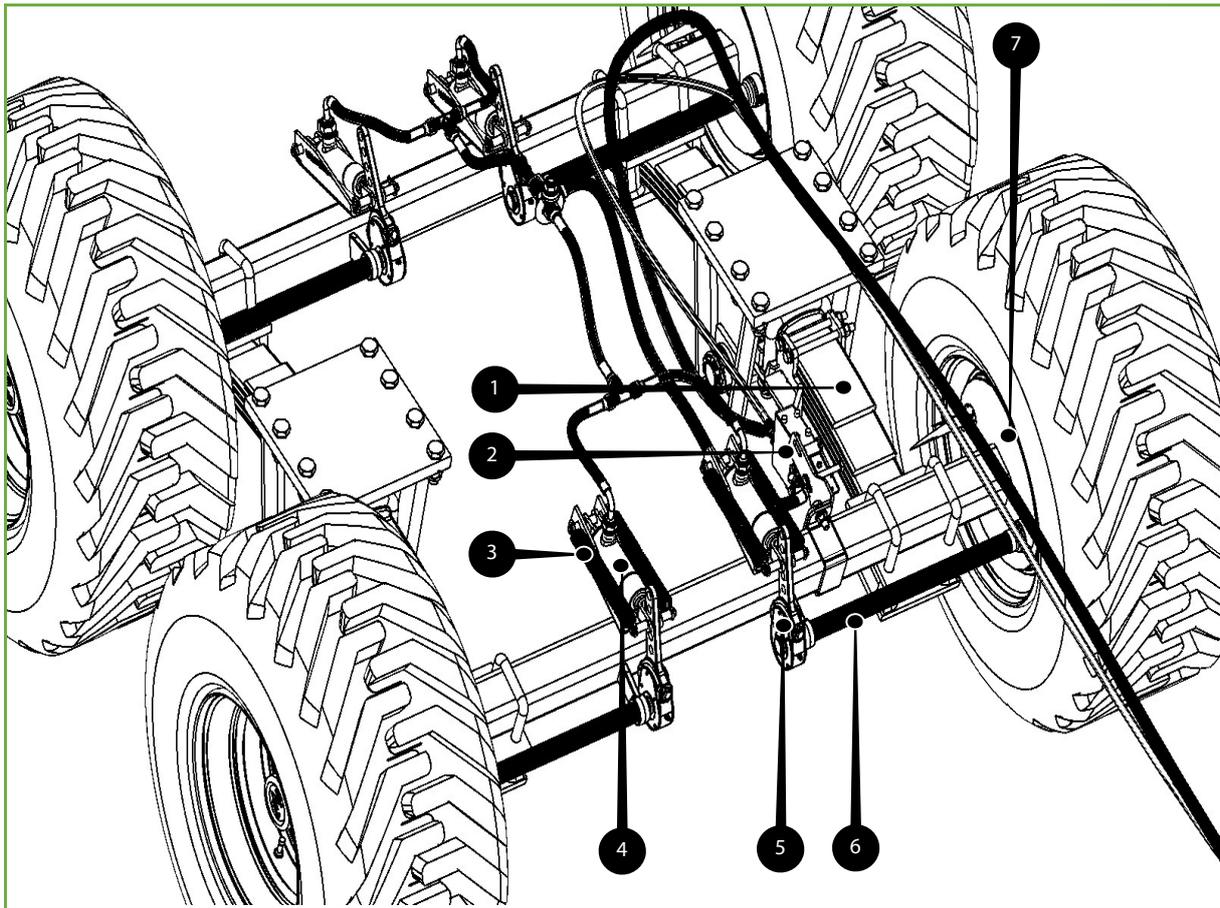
Hydraulic braking system (spring-loaded tandem axle)
